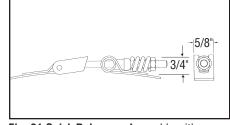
Quick Release – Assembly with Spring Loaded Screw – Assembly Welded to Sheath with 1/4-20 screw
